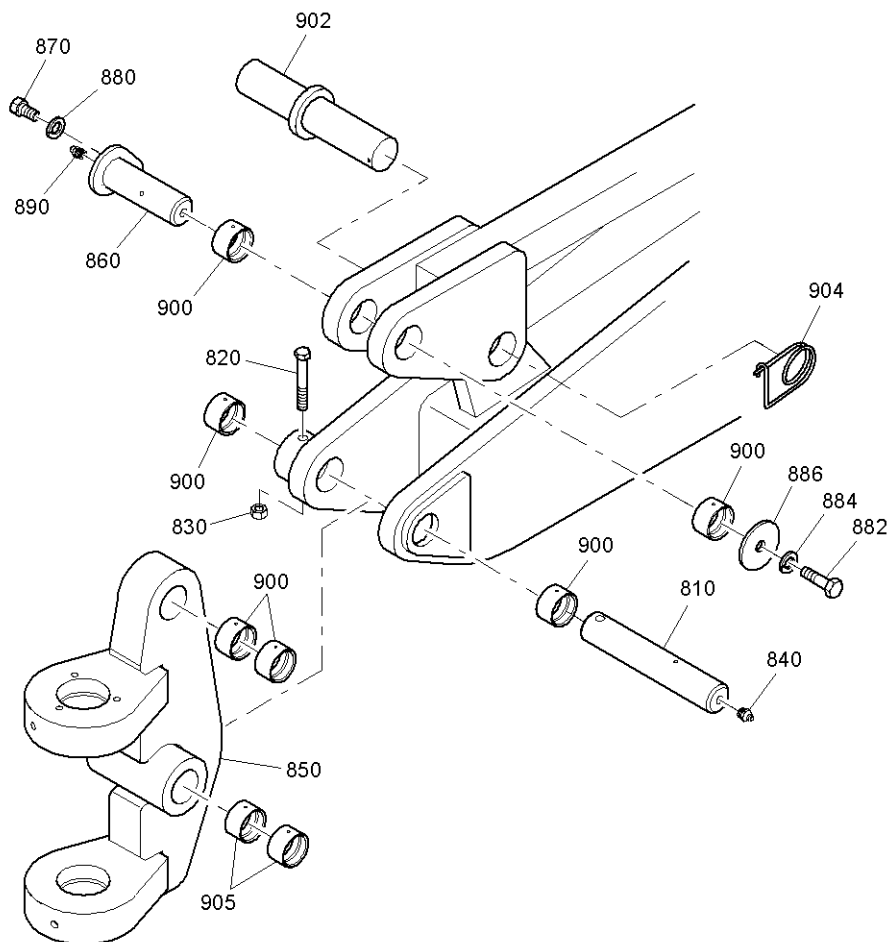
FRONT AXLE ASSEMBLY (SHEET 5 OF 6)
